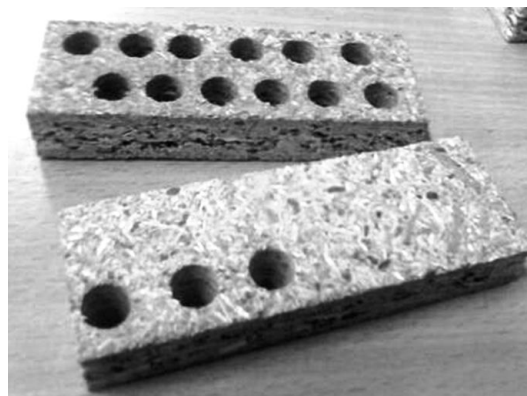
Samples of boards with 10% of SBR gum granulate after machining
